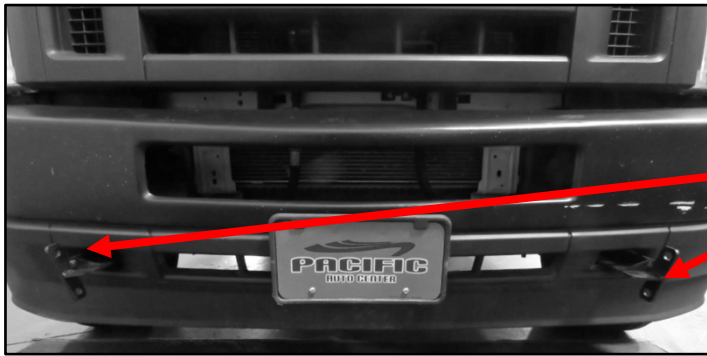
Attach mounting bracket 2 to mounting bracket 1
